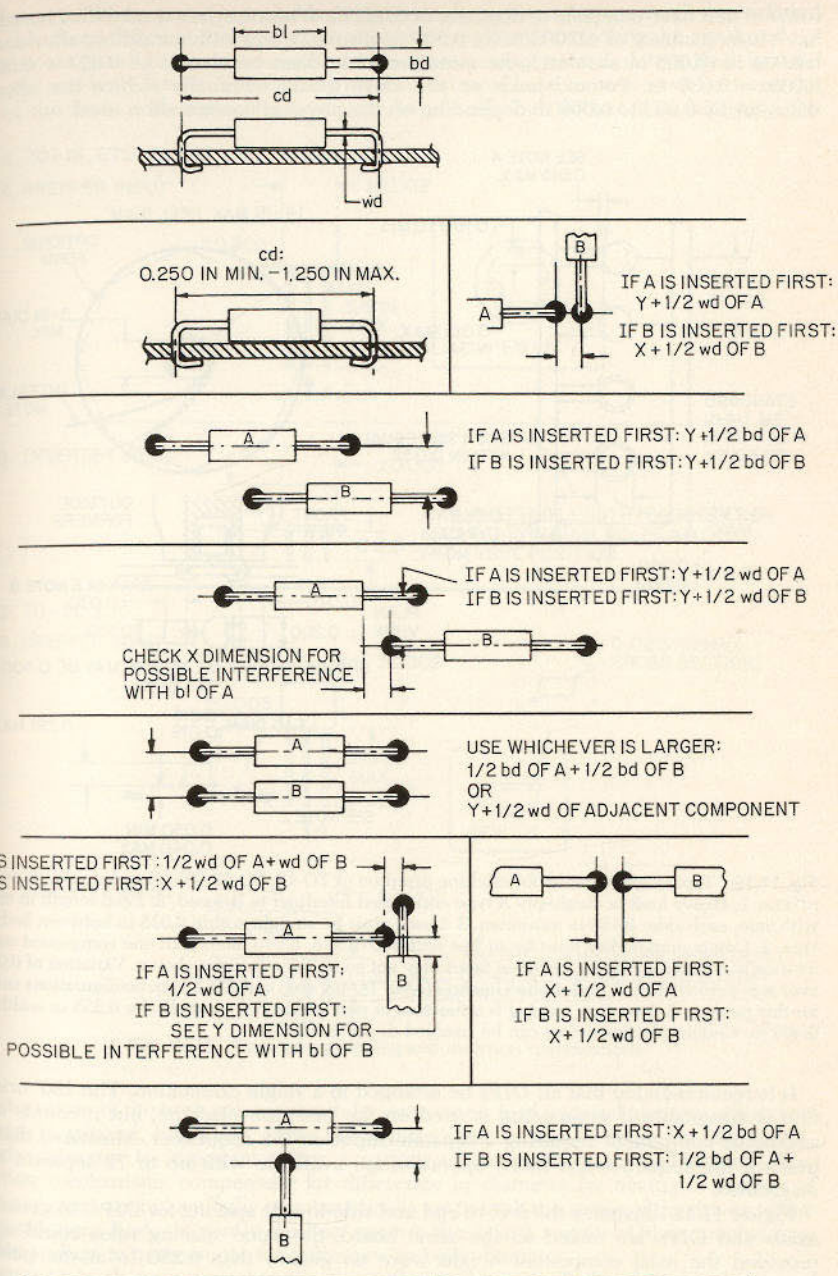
Clearances required for various component locations and sequences of assembly. Key: bl = body length; bd = body diameter; wd = wire diameter; cd = center distance. Dimensions indicated are minimum tolerance unless otherwise indicated.
